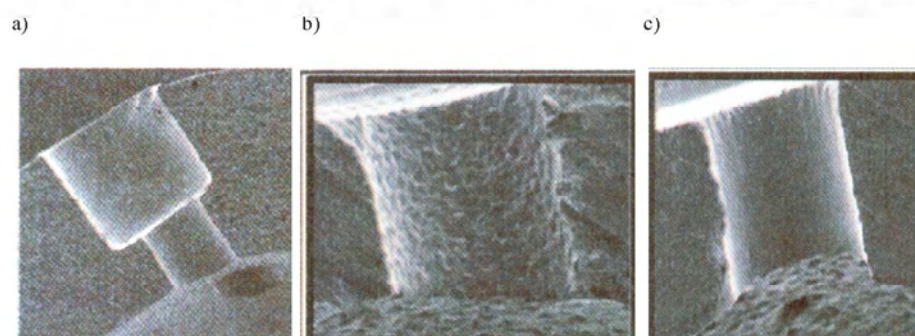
Cross-sections of the injector fuel outlet channels: a) cross-section of a typical injector outlet channel (GDI), b) channel made with the EDM method, c) channel made with the Femto-Second Laser Drilling Process [10]
